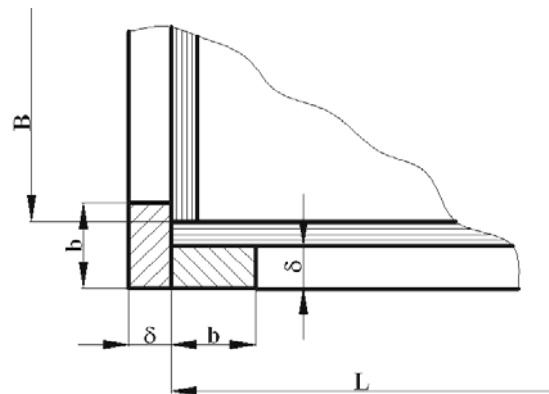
Elements that download the stacking forces. Boxes with longitudinal lamellas on side panels and end panels
